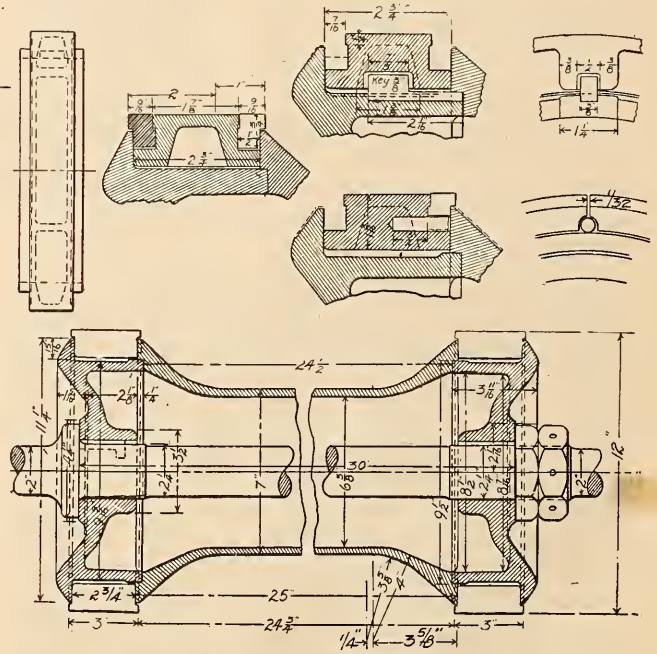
HEAVY FREIGHT LOCOMOTIVE—L. S. & M. S. RY. —PISTON VALVE.
